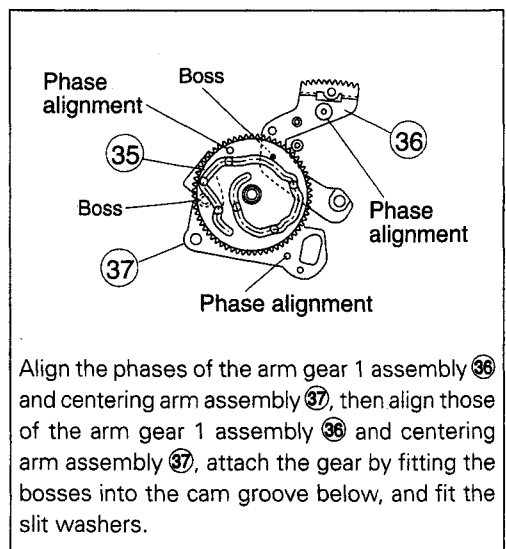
(b) Removing the Centering Arm Assembly ③⑦
